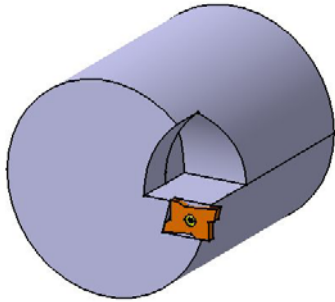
Reamer with multi-edge insert placed on the frontal face.
